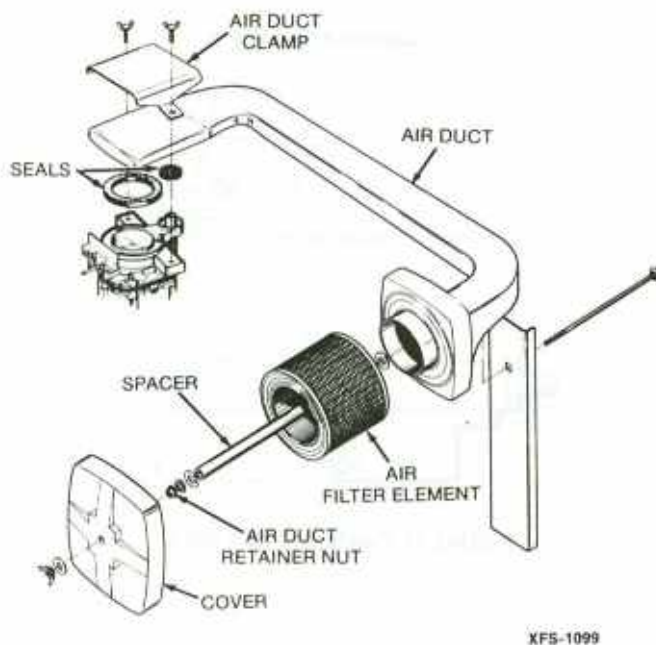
BFA, BGA, AND NH SPEC K-P AIR FILTER ASSEMBLY
